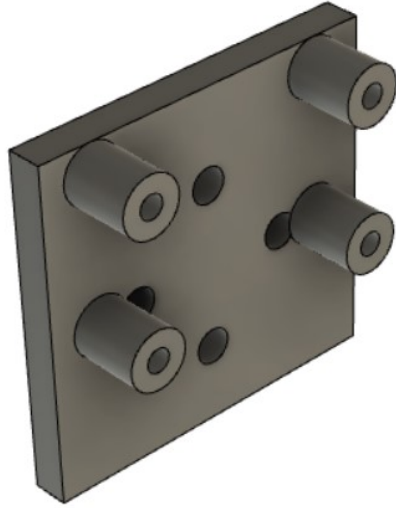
Robotic Arm Mount. This allows the robotic arm to be mounted to the 2020 Aluminum frame. Rows of holes are for screws which attach the mount to the inside slots of a framing rod. Large standoffs are used to get the arm closer to the turntable. The part is mostly hollow to speed up printing time.
